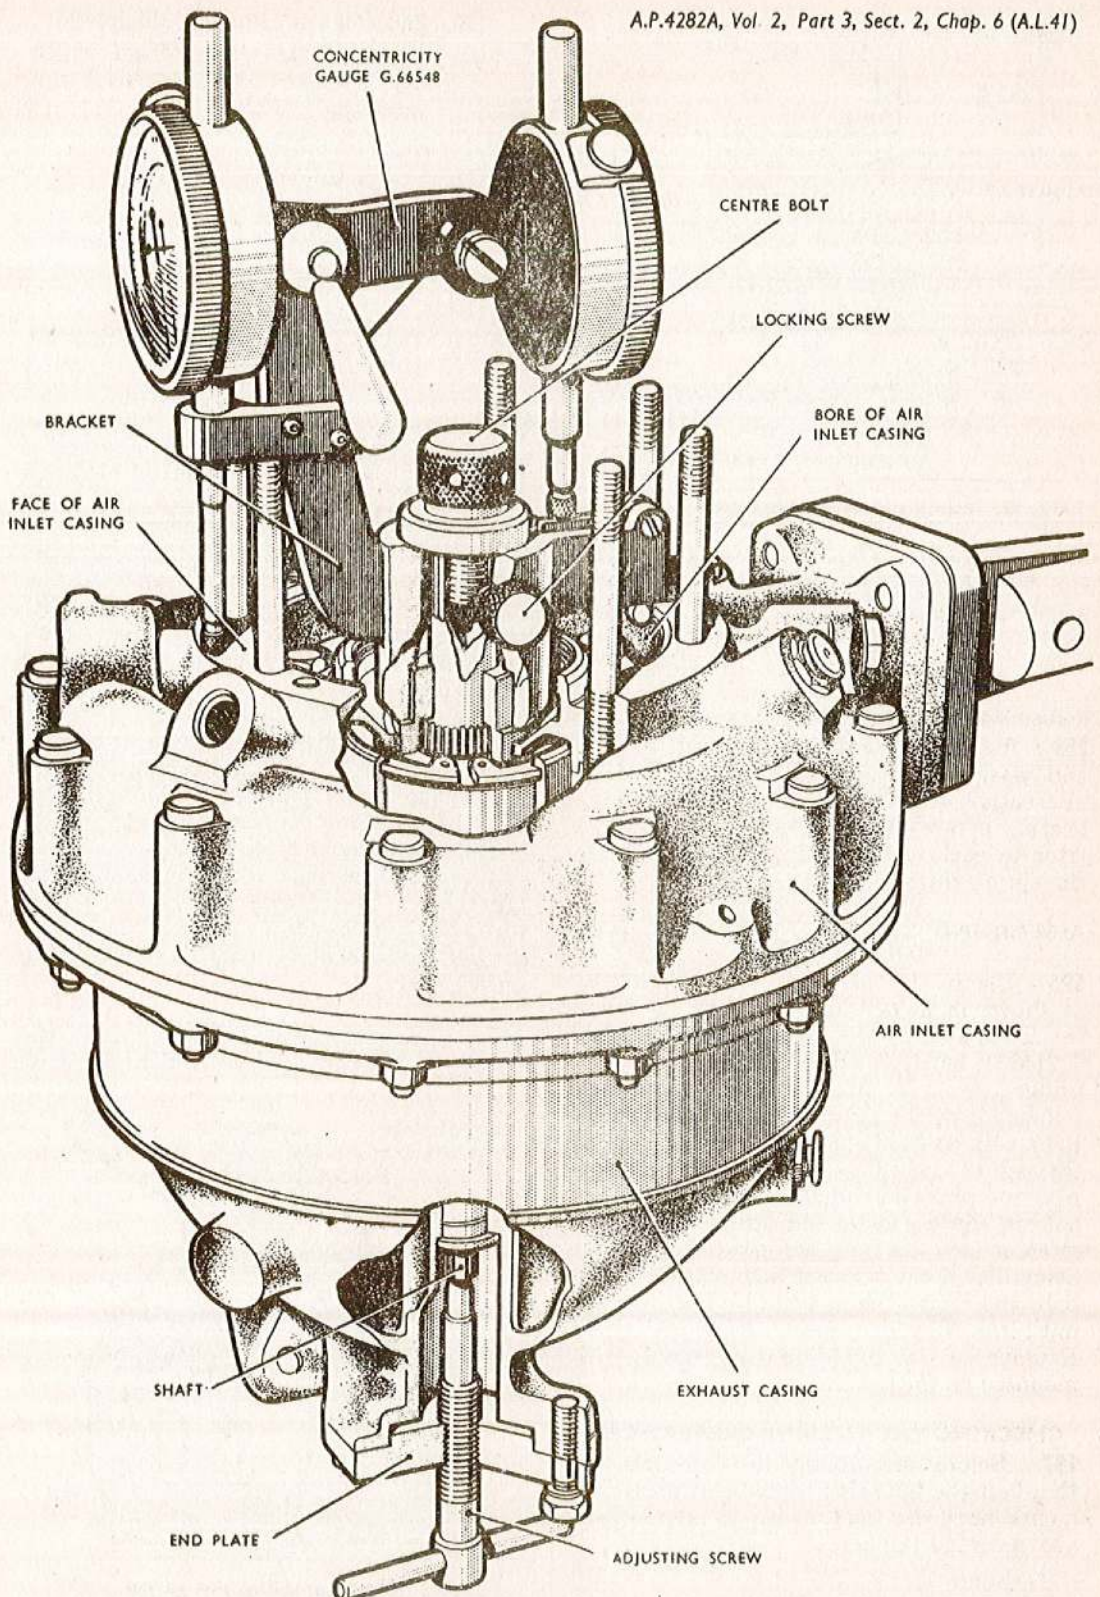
Checking the face and bore of the air inlet casing for concentricity
